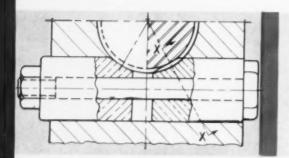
The clamps illustrated in this sketch are made of hard bronze material.
